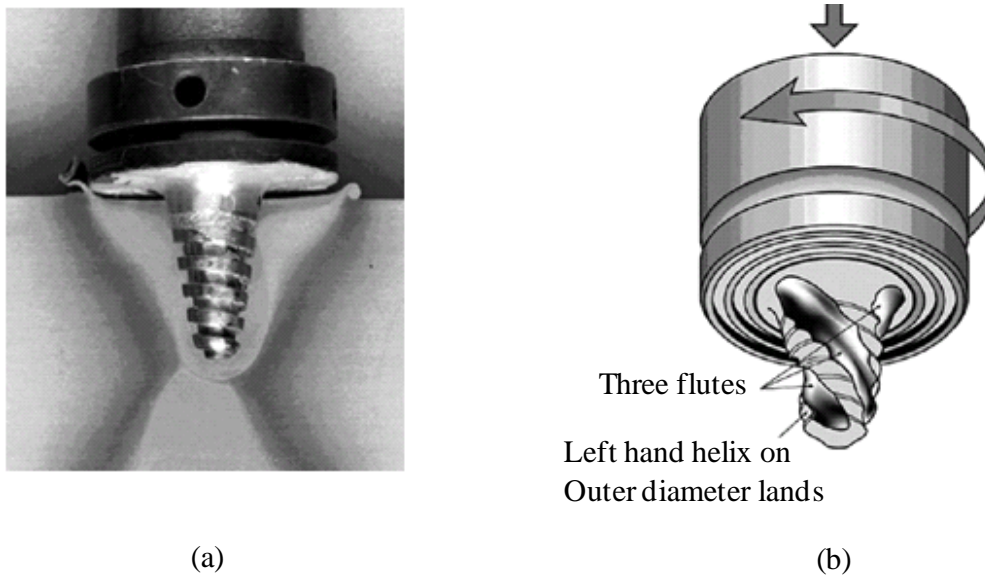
Schematic drawing of the friction stir welding (Thomas et al. 1991)
